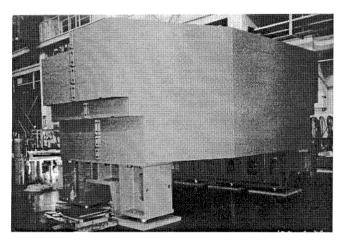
Lower yoke of E-sector magnet under assembling at Niihama works, Sumitomo Heavy Industries, Ltd.
